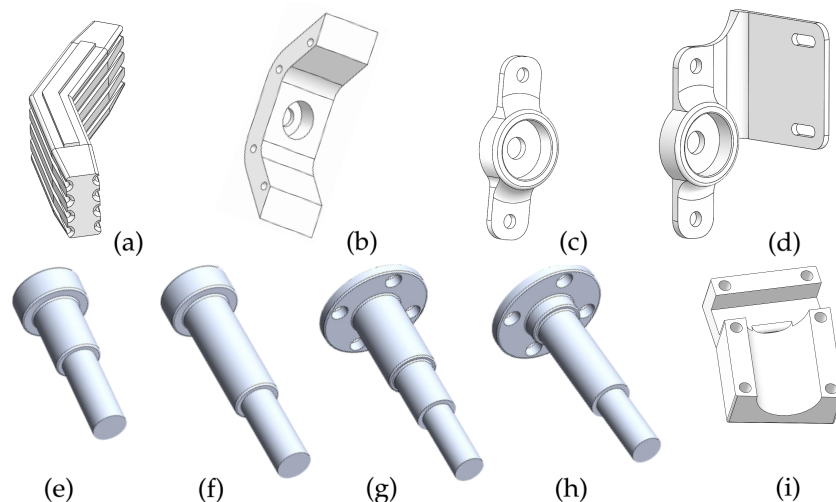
Aluminum profiles junction (a), roll bearing holder (b), pitch bearing holder (c), pitch bearing holder with motor bracket(d), roll idle shaft (e), pitch idle shaft (f), roll motor shaft (g), pitch motor shaft (h) and propellers arm junction (i).
